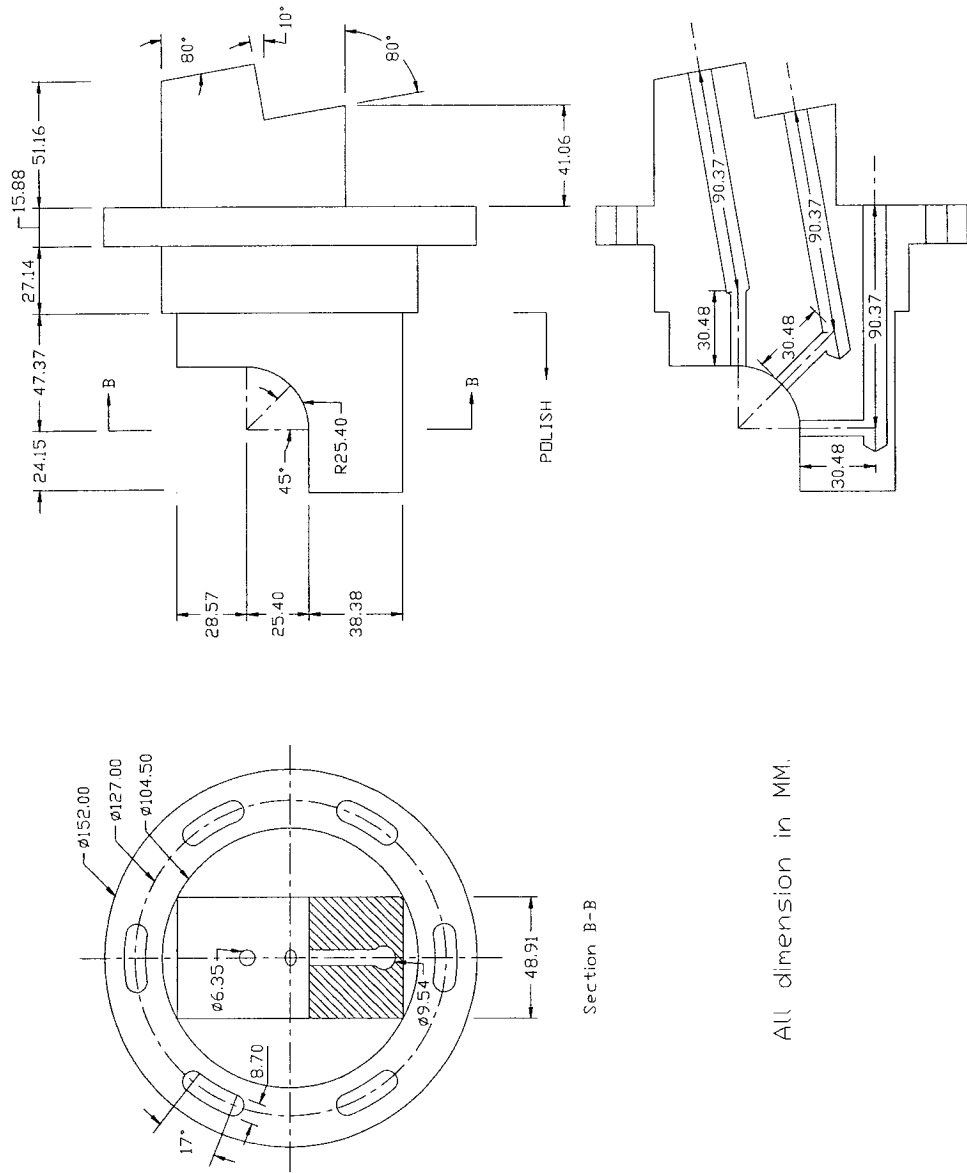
Brass test section, shown installed in two-phase test facility.
